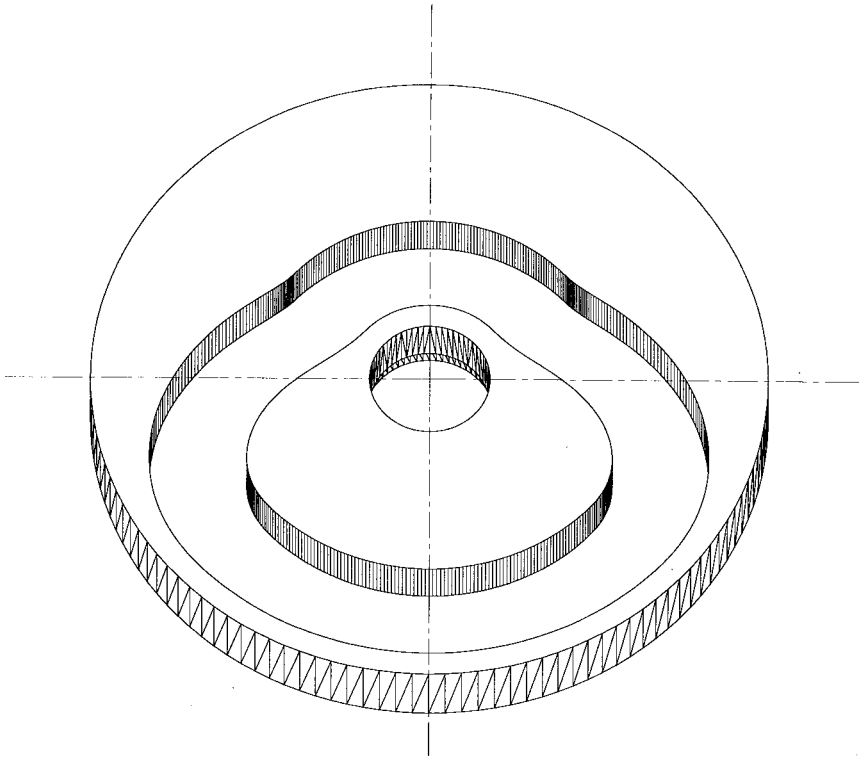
Sample Cam drawing with cam contour and tape check.
